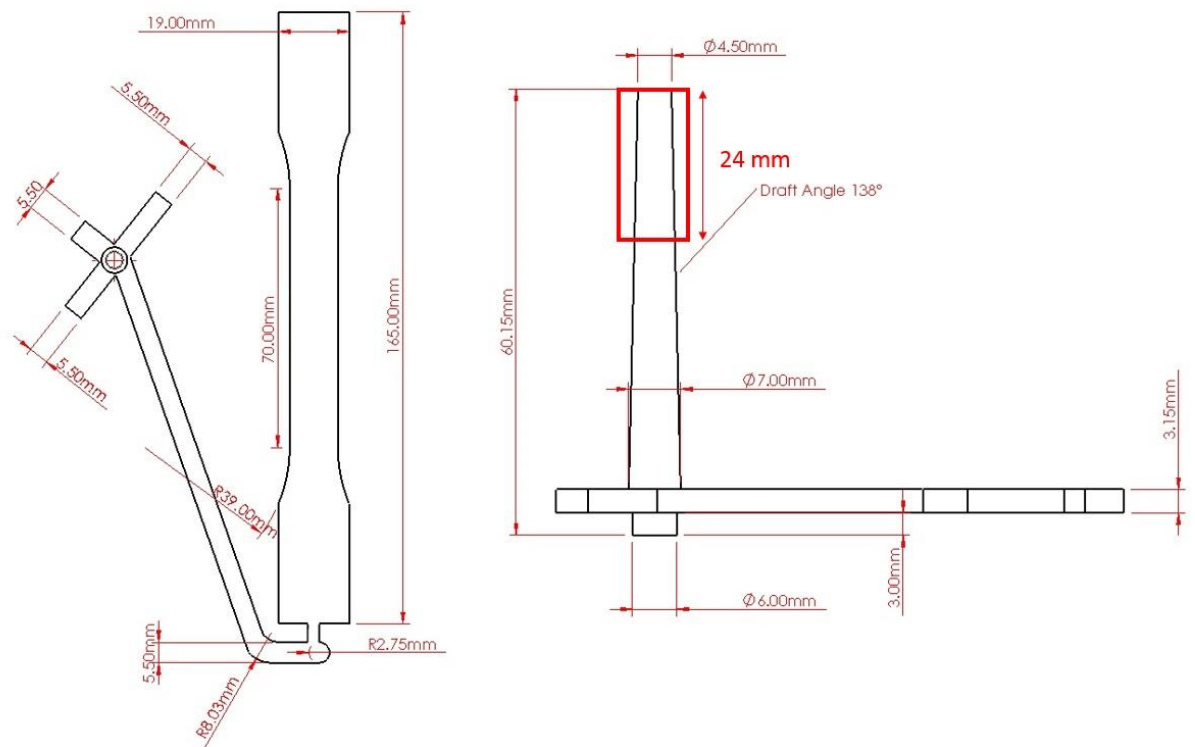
Technical drawing of 6 mm Battenfeld BA750/315 CDK injection moulding machine nozzle.
